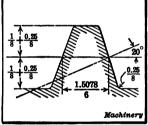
Hob Tooth for a %-Pitch Fellows System Stub Gear-Tooth
